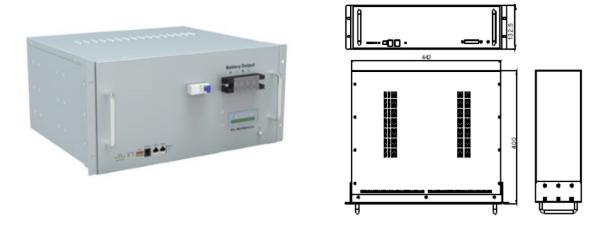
Appearance and Mechanical Drawing of U3C-75P-48V-A
